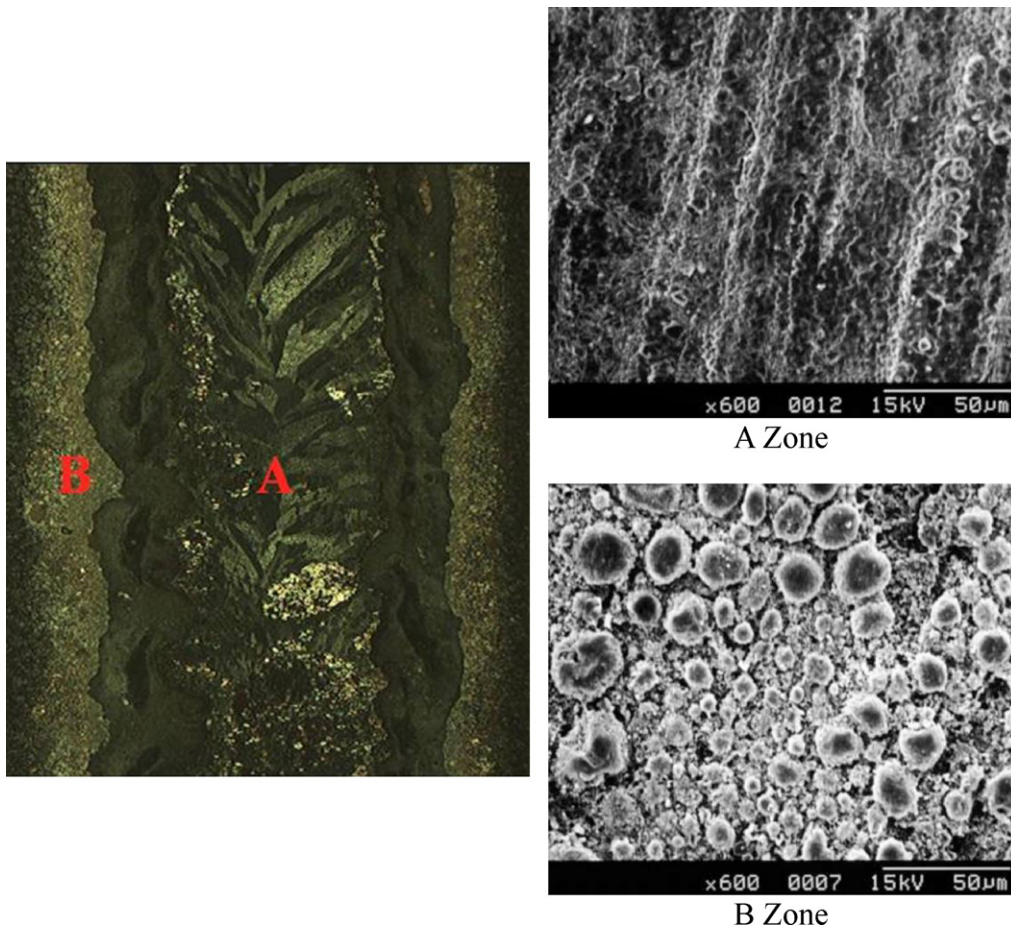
Effect of Al_2O_3 flux on weld surface appearance.
